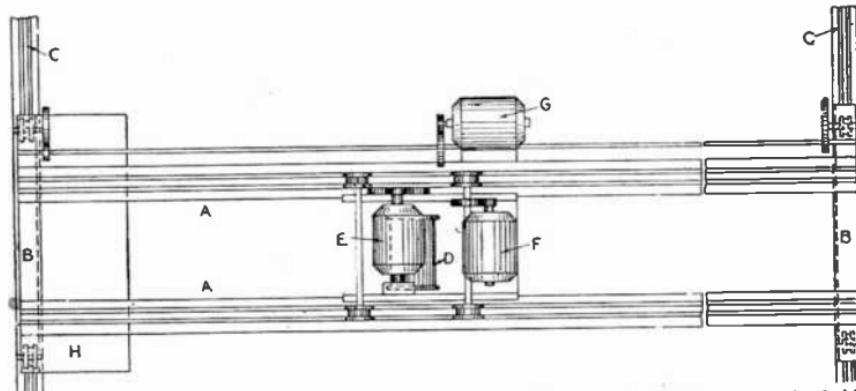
,895.—Electric traveling crane. *The parts are:* AA, cross girders known as the *bridge*; BB, end carriages; CC, elevated track structure or *gantries*; D, hoisting drum; E, hoisting motor; F, transverse propelling motor; G, longitudinal propelling motor; H, cage or operator's platform.
